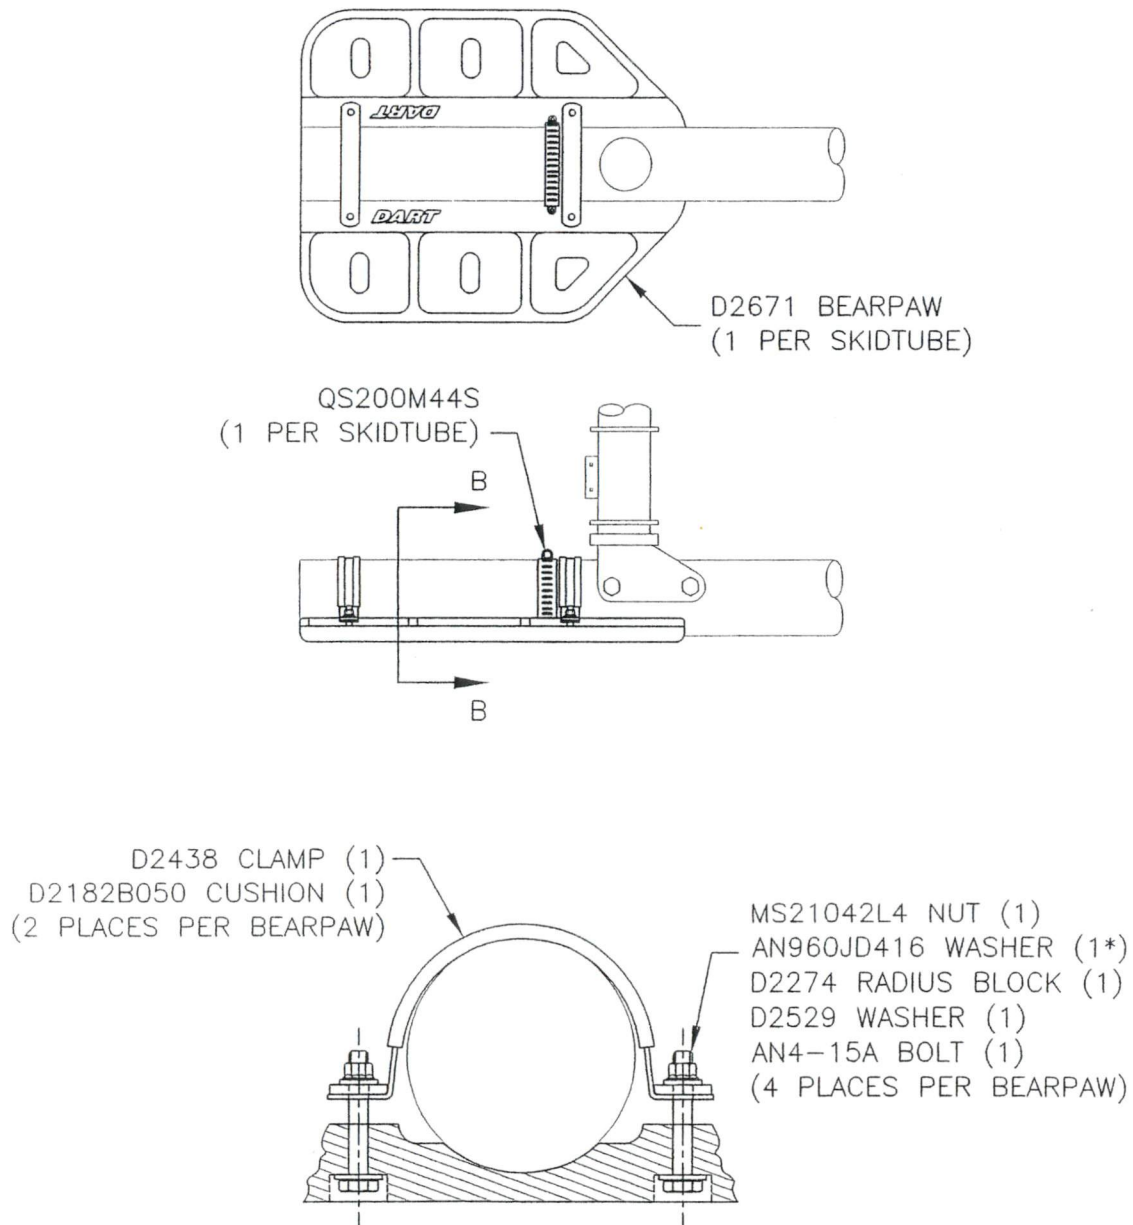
D500-572-011 BEARPAW INSTALLATION
